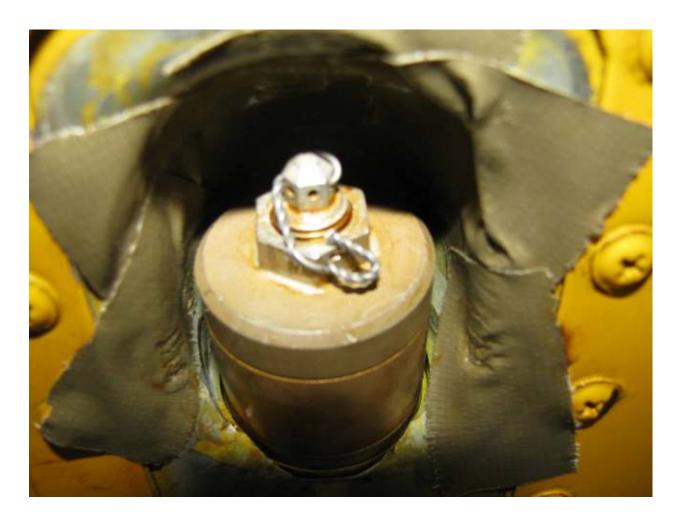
Properly installed and torqued ALEC cable. Each side is symmetrical at the bath tub fitting and internally with respect to the thread engagement into the swage fitting. The tension nut, above, has been rotated $4\frac{1}{2}$ turns after a pre-torque of 50 in-lbs has been applied to the tension nut.
